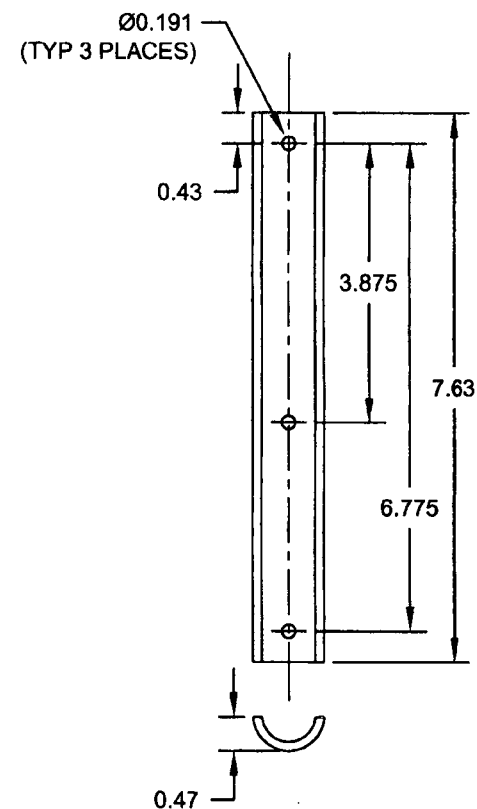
SADDLE (SHEET 3): Ø0.257 TYP 3 PL WAS Ø0.191 (TYP 3 PLACES) AS SHOWN:
